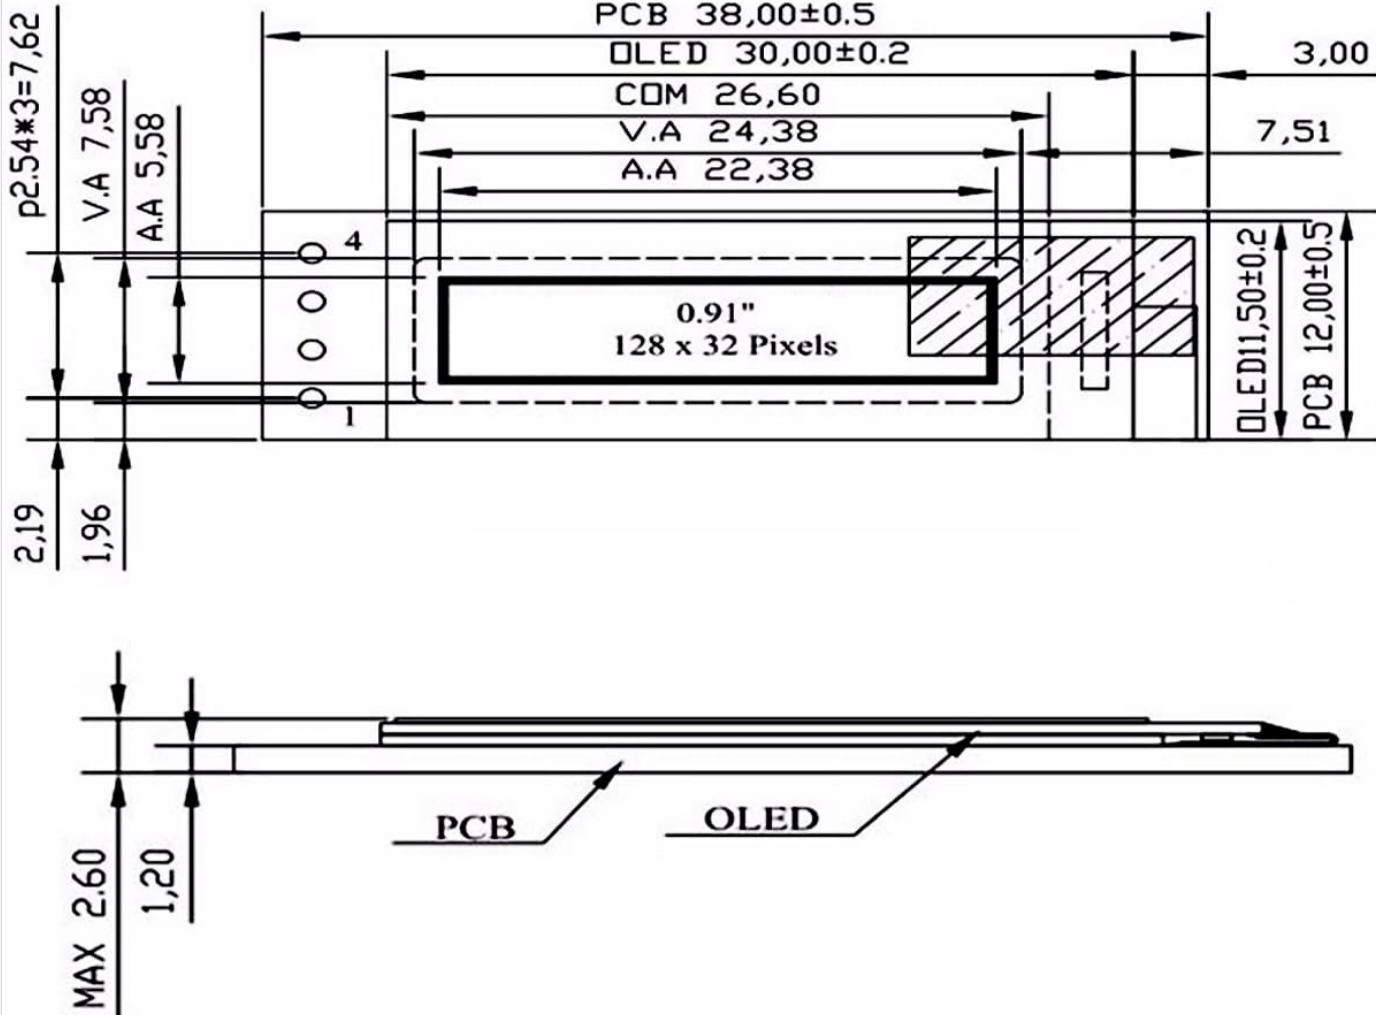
Detailed physical dimensions of the OLED module, including PCB size, OLED area, and overall thickness.
